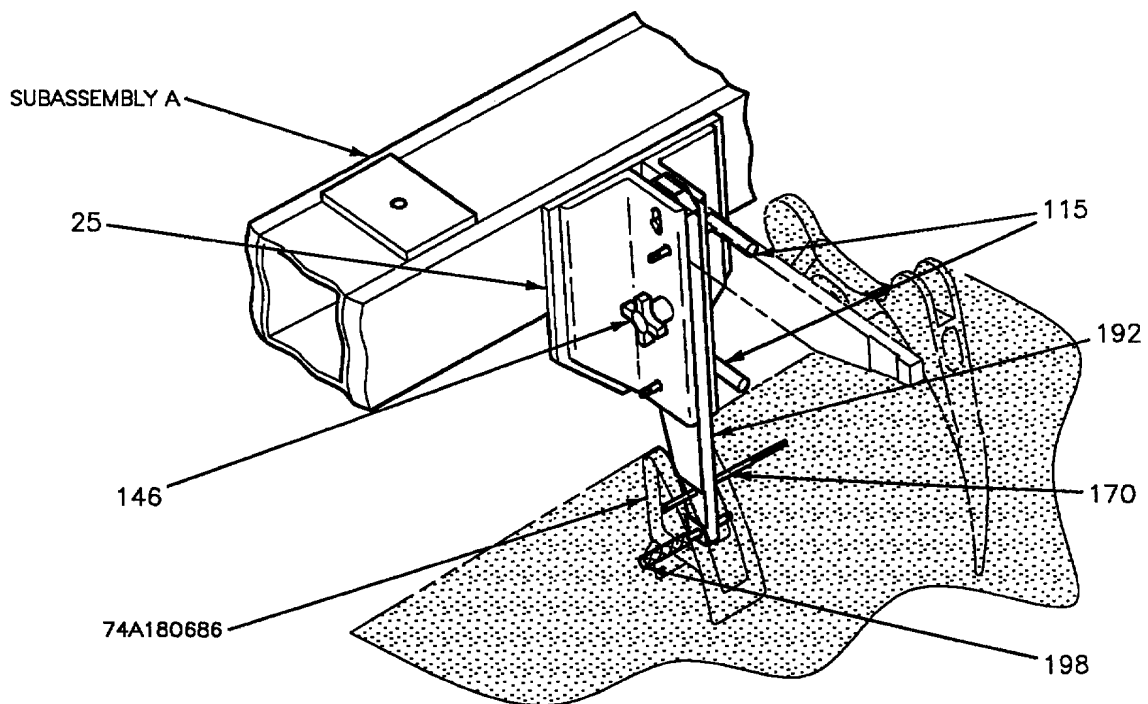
Roller Supports, 74A180686 and 74A180687 (Sheet 2)
